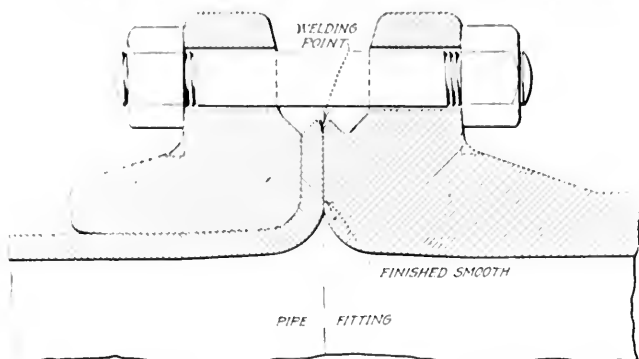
SPECIAL HIGH-PRESSURE-WELDED JOINT FOR STEAM LINE
